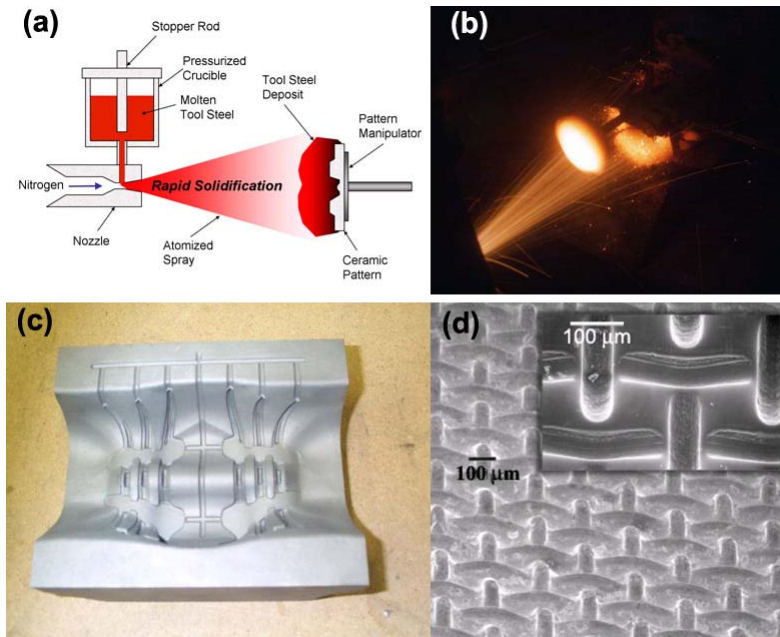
Spray forming molds and dies using a de Laval atomizer. (a) Schematic of approach. (b) Tool steel spray. (c) Spray formed P20 tool steel plastic injection mold insert for footwear. (d) Micron-scale features on a substrate (inset) were captured in the surface of spray-formed metal.
